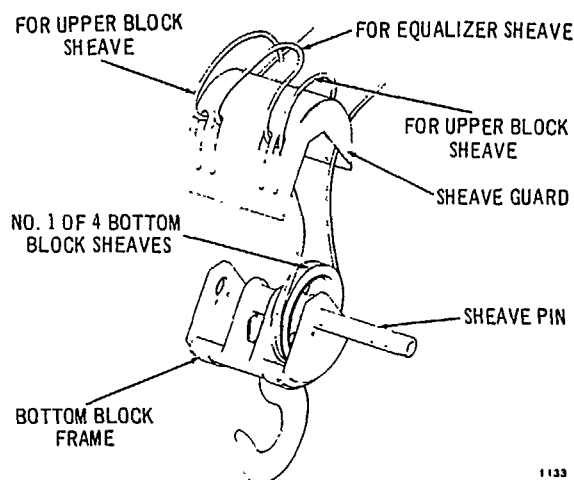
Installing First Part of Wire Rope in Four Part Double Reeved Bottom Block
